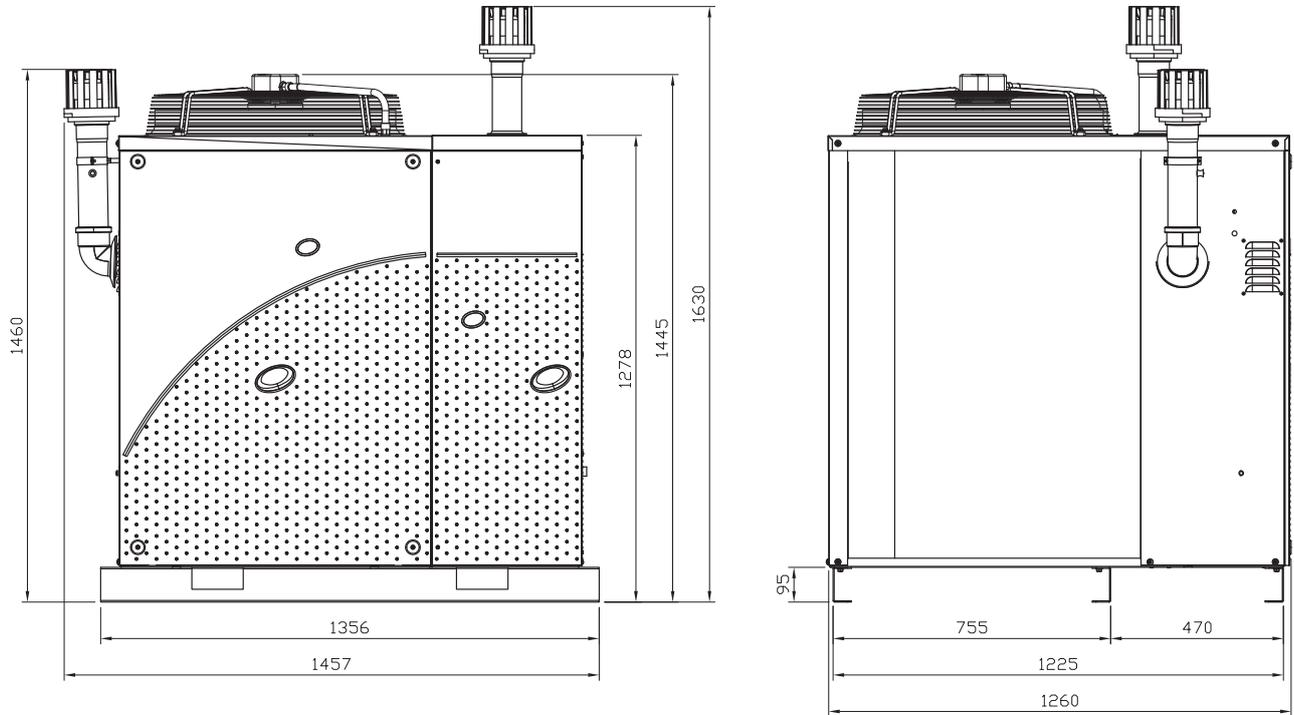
Dimensions (S1 Silenced ventilation) - Front and side view (dimensions in mm)
